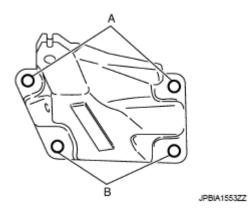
Identifying Engine Mounting Brackets On Cylinder Block Courtesy of NISSAN MOTOR CO., U.S.A.
